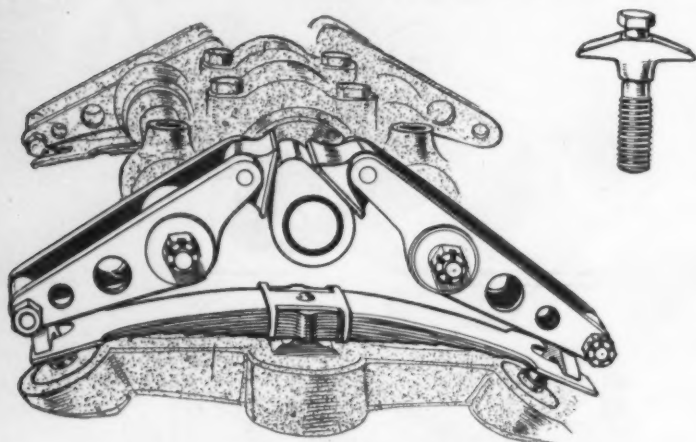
THE OVERHEAD CAMSHAFT GEAR OF THE LEYLAND EIGHT-CYLINDER-IN-LINE ENGINE
